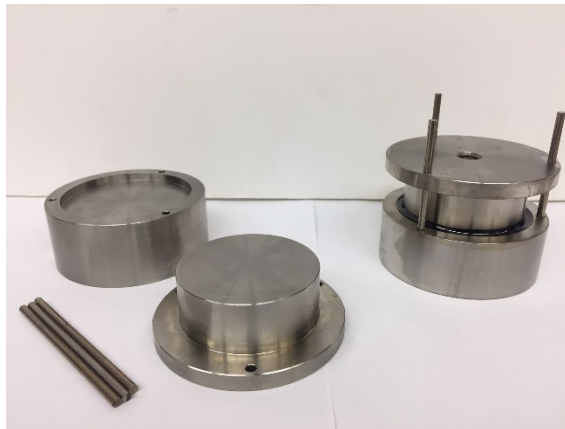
Poker chip stainless-steel mold and laboratory-molded specimen between the top and bottom pieces that are aligned using three alignment pins (top and bottom of the mold with the three alignment rods are shown to the left and an assembled mold with the binder sample is shown to the right).
